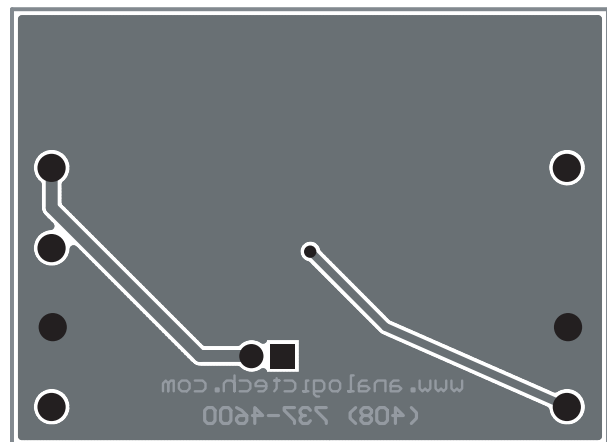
AAT4674/AAT4674-1 Evaluation Board Bottom Side Layout.
